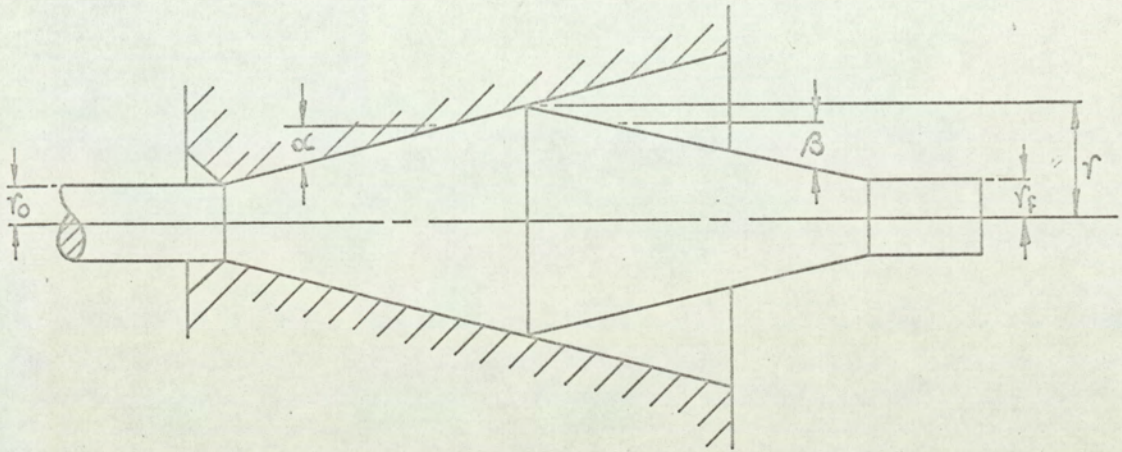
SHOWS THE GEOMETRY DURING THE EXTRUSION OF THE REAR TAPER
